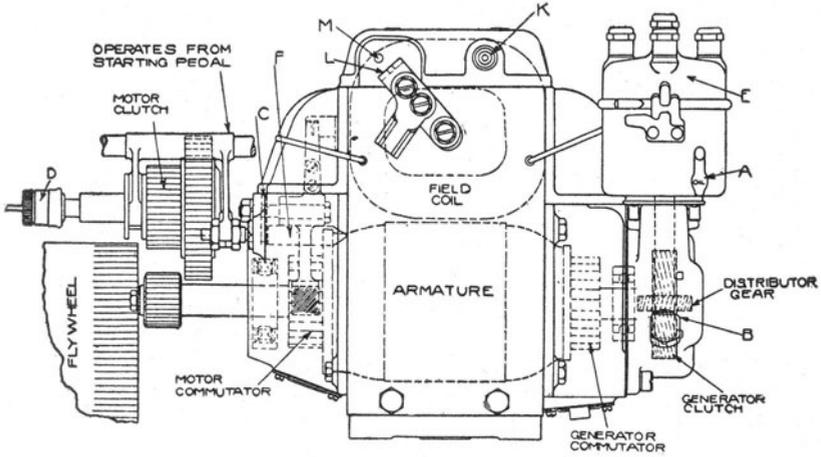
Sketch of the Kettering’s starter-generator machine, for the 1912 Cadillac. The electrical machine rotor could be joined to the engine with two very different transmission ratios; an almost direct drive through the water pump, very directly connected to the crankshaft and at about 1:100 through the engine flywheel. The assembly included the high tension distributor and contact breaker also.
